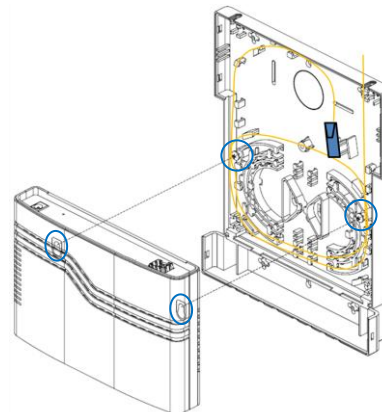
Install the device onto the cable tray (with LAN Cable Protection Holder)
